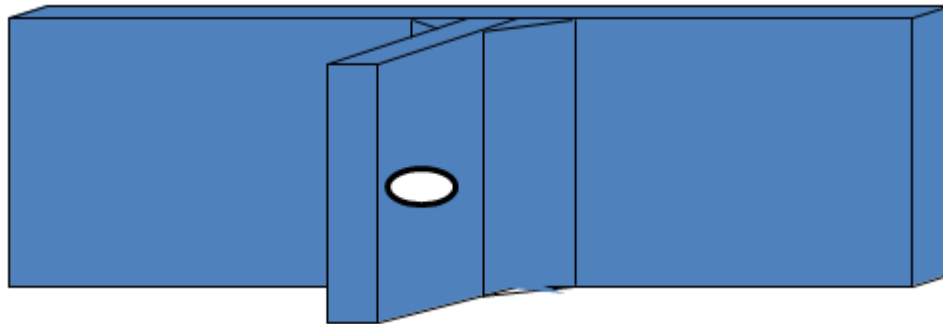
Sketch of the fatigue sample that was cut from the original weldment.
